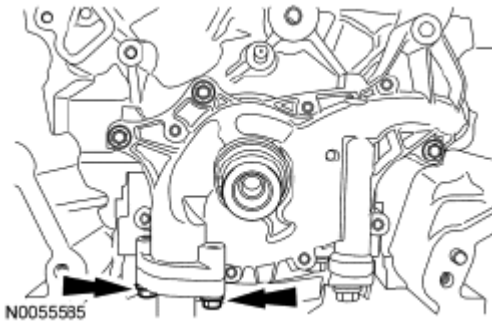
Locating Oil Pump Screen & Pickup Tube Bolts
